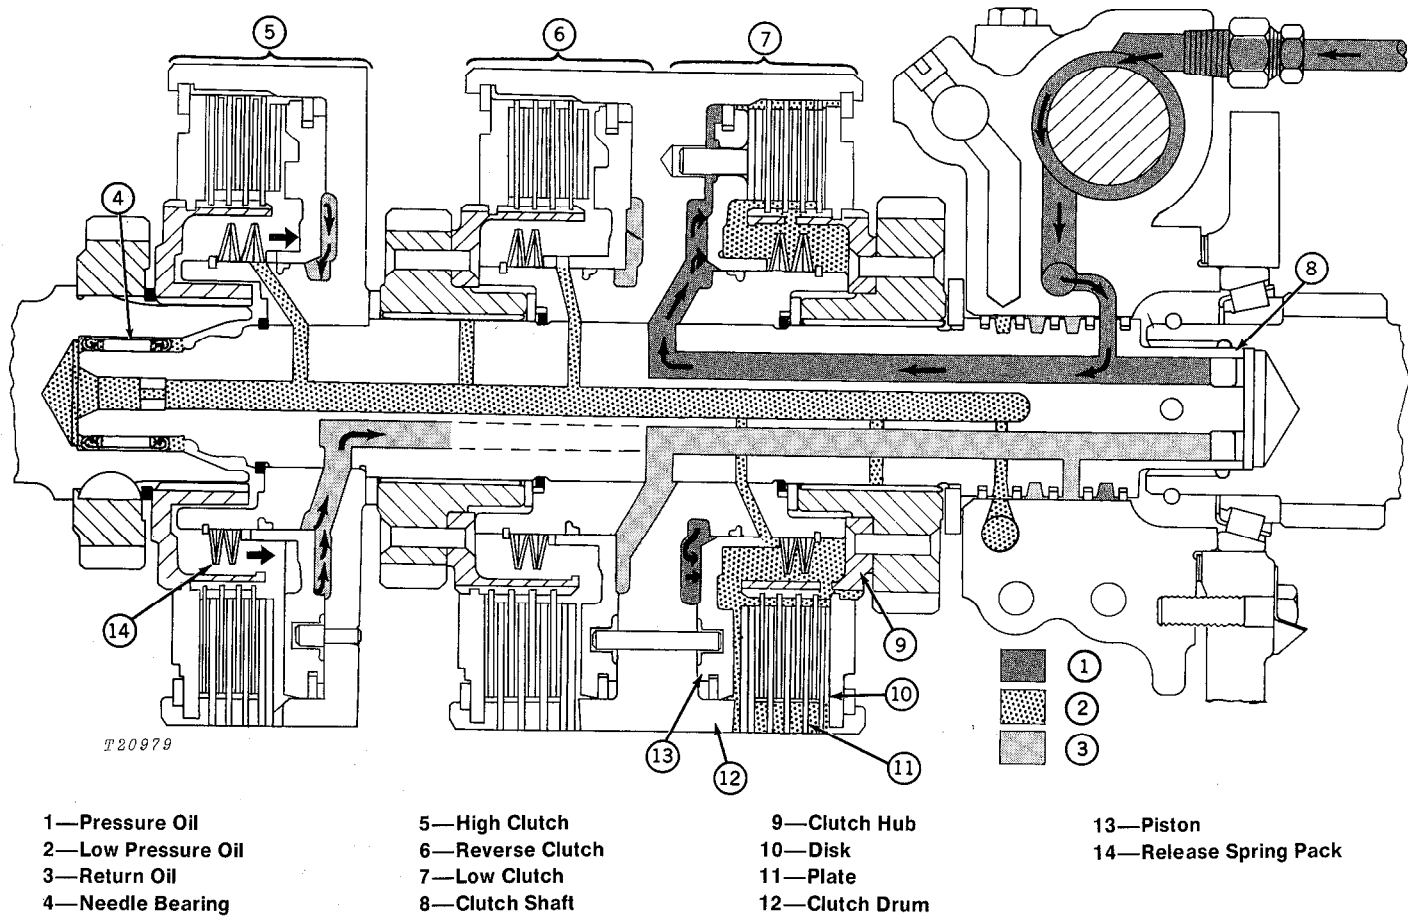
Clutch Engagement (Shifting High to Low Gear)
